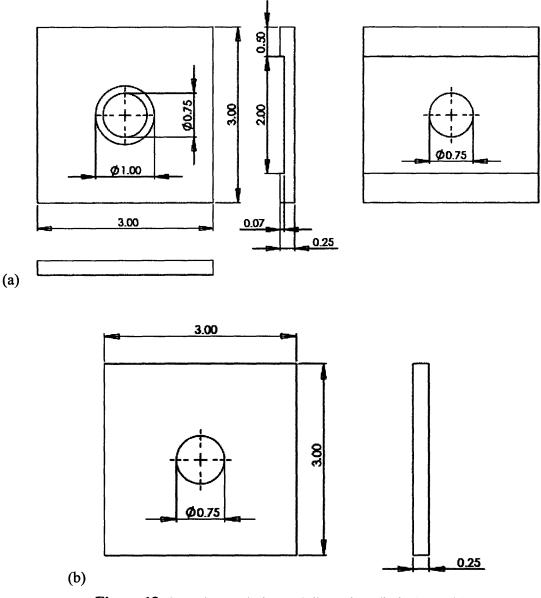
Stage heater design and dimensions (in inches). (a) Top plate. (b) Bottom plate.
